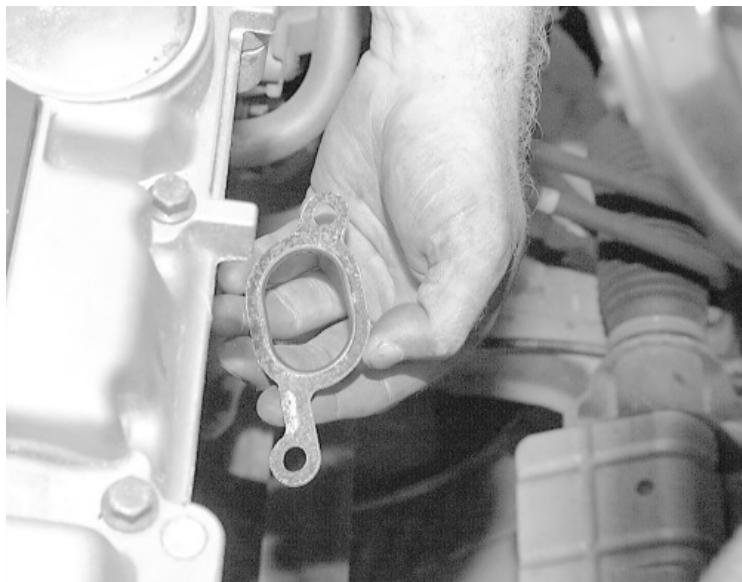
The exhaust manifold uses individual gaskets around each port in the head; replace them before manifold installation
